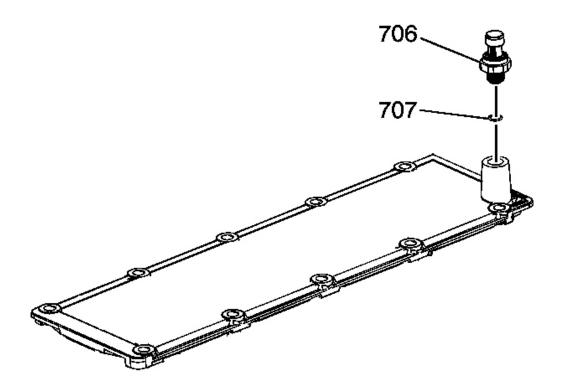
View Of Oil Pressure Sensor & Washer Courtesy of GENERAL MOTORS CORP.
